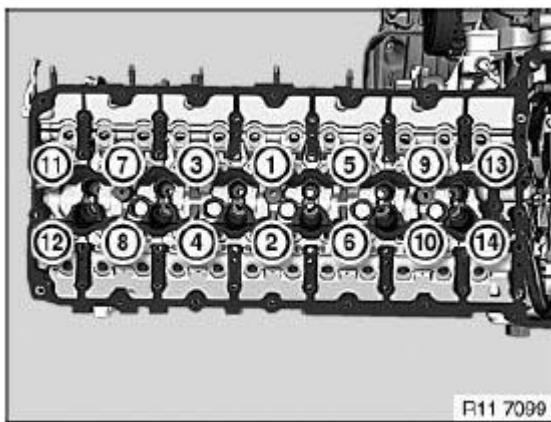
Identifying Cylinder Head Bolts Tightening Sequence
